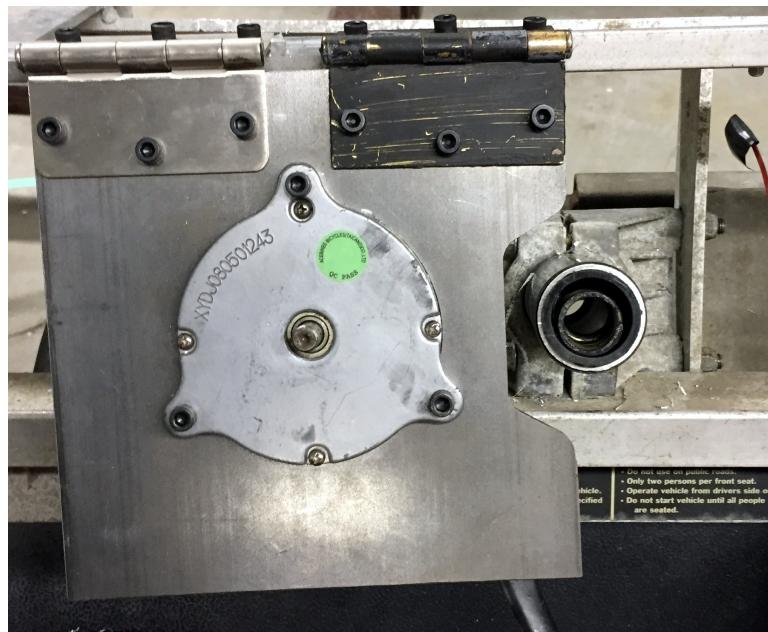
The steel plate had to be machined in a CNC mill to avoid the steering column.
